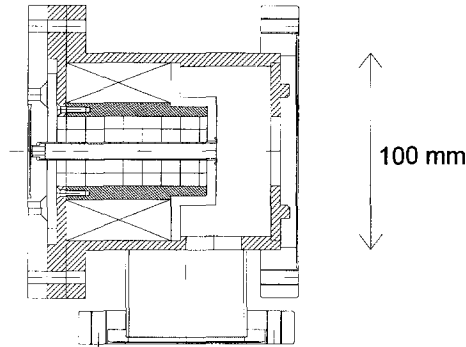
Drawing of the transport lens with the pole pieces(shaded area), the lens coil and the stigmator, alignment unit. At the left side the pumping aperture can be seen. (drawing by O. Wolfs)
